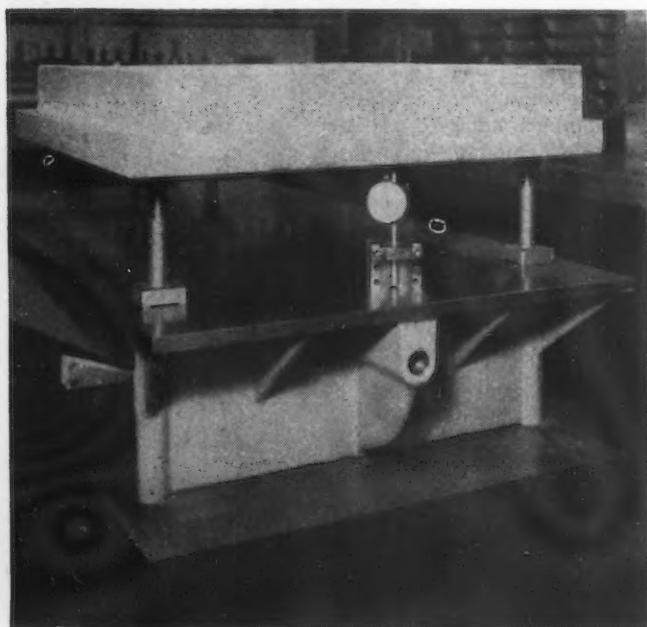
Granite surface plate being inspected for flatness by dial indicator and surface gage.
